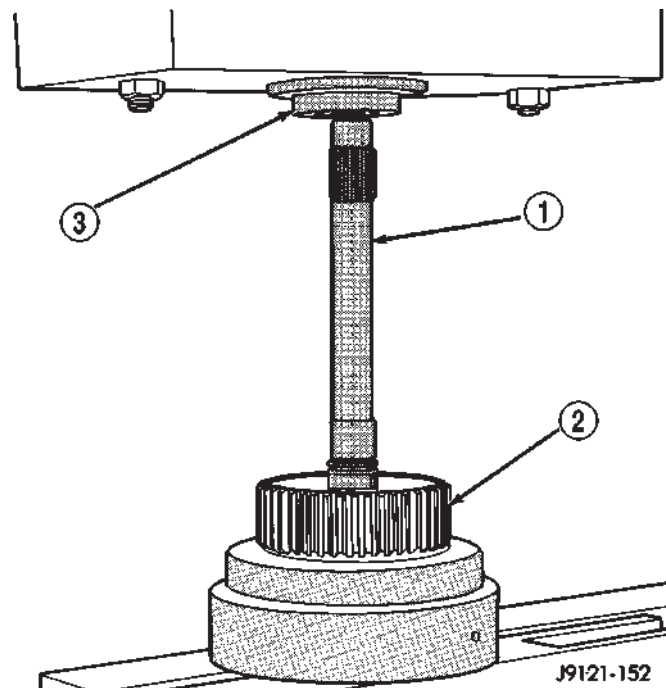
Pressing Input Shaft Into Rear Clutch Retainer
